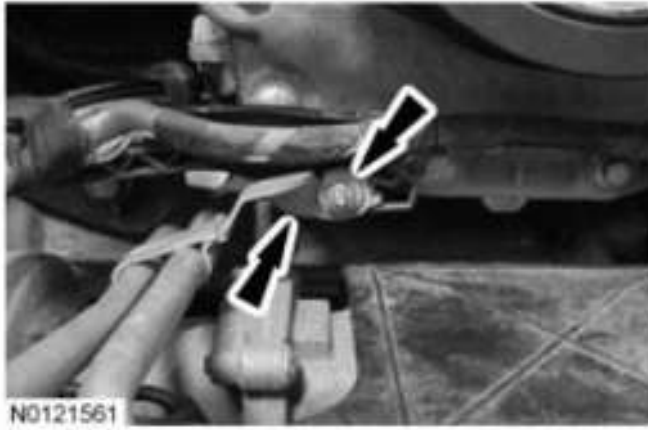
Locating Transmission Cooler Line Bracket And Nut
